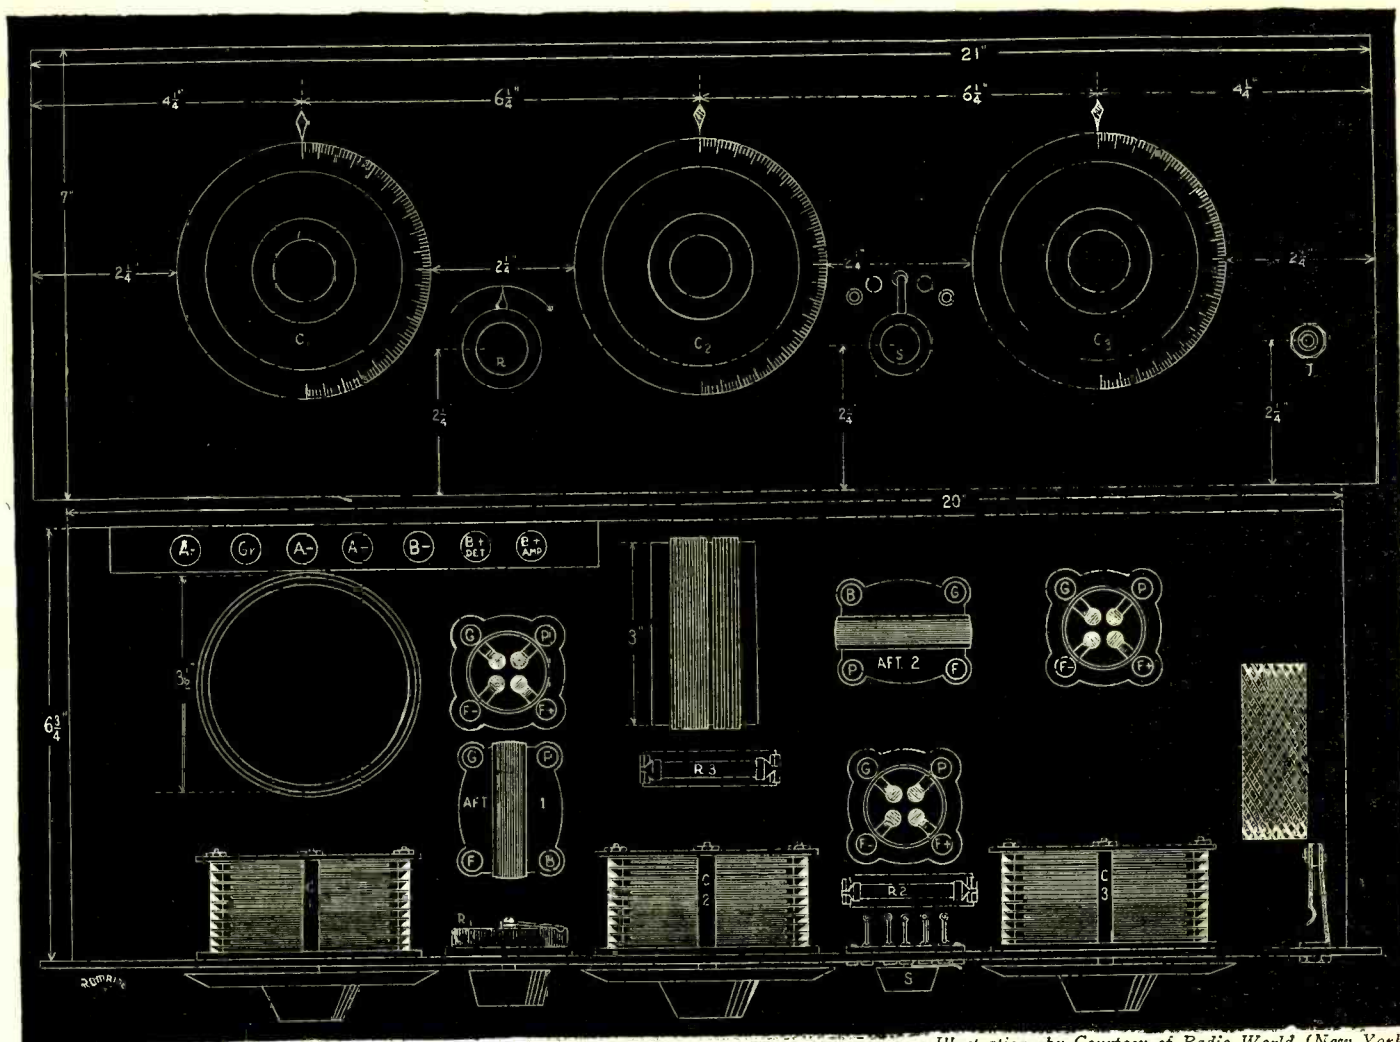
The panel layout, and Fig. 3, the assembly plan of the set. Instead of the plate coils described in the article a honeycomb coil may be used. It may be a 75-turn coil from which four 14 turns have been removed.
